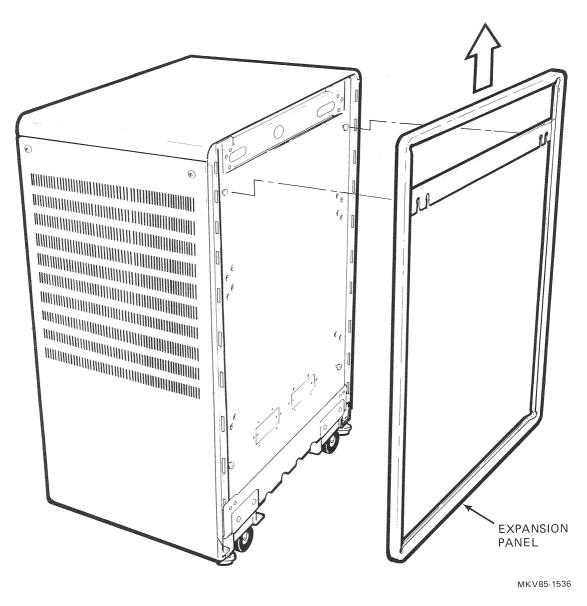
CIPA Cabinet - Expansion Panel Removal
